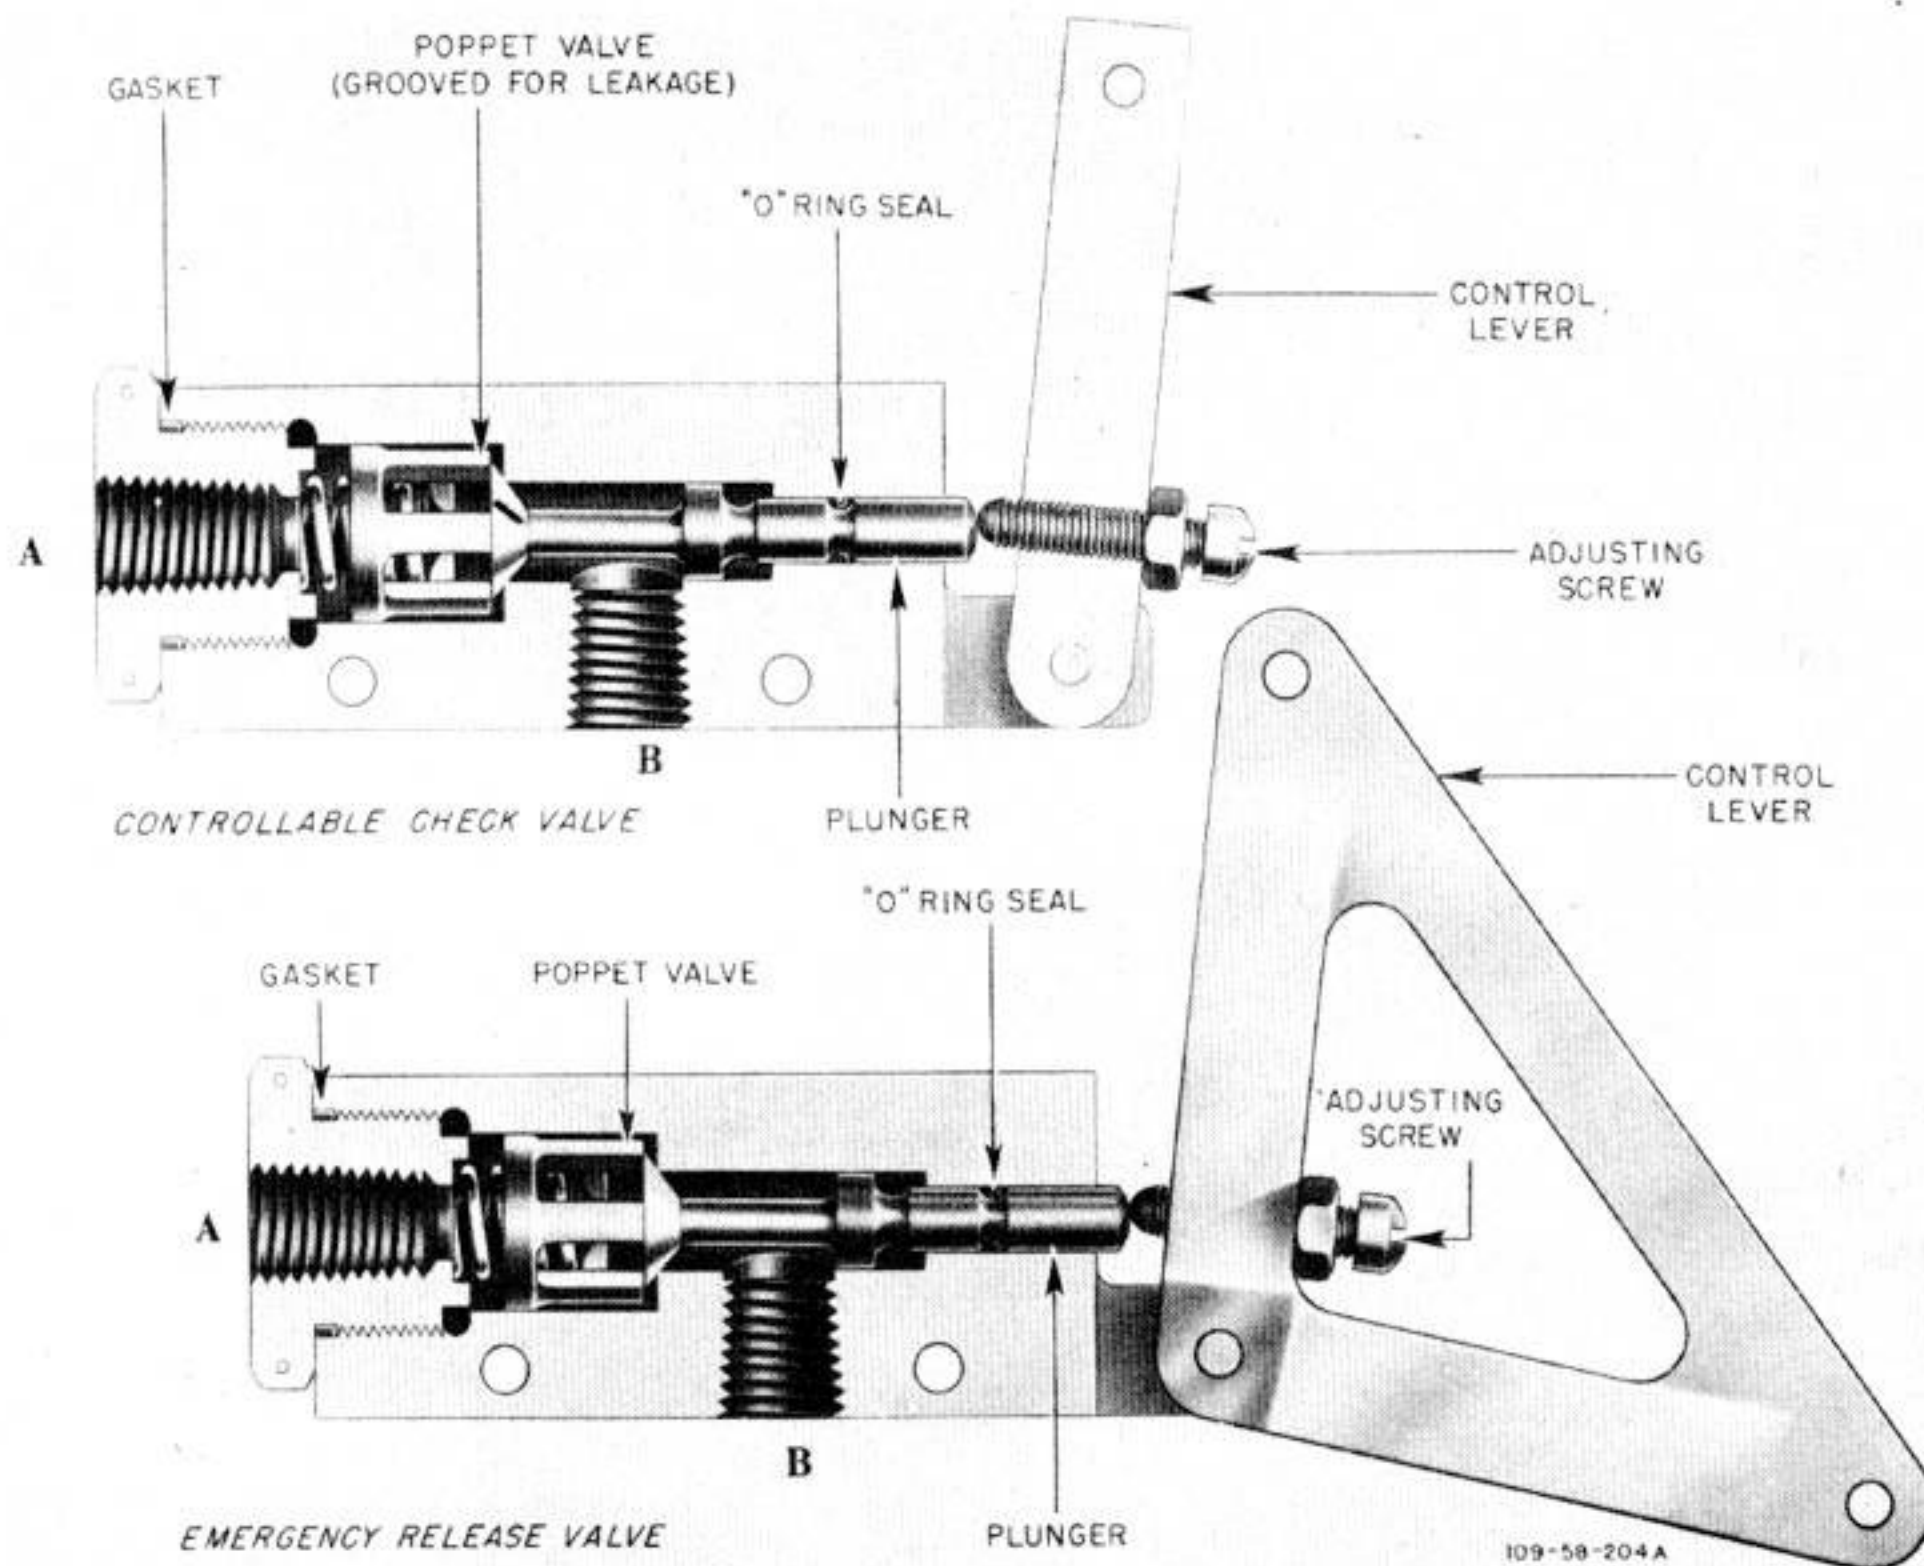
Hydraulic Controllable Check Valve and Emergency Release Valve
